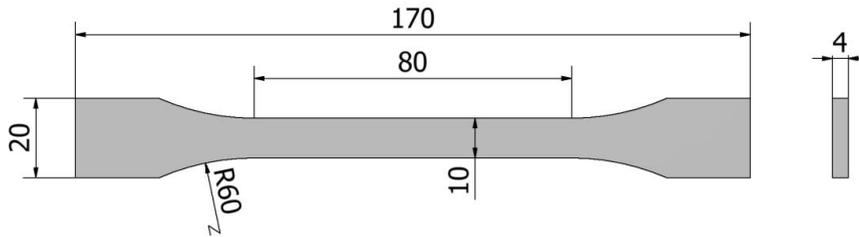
Geometry of the tensile samples. Dimensions in mm.
